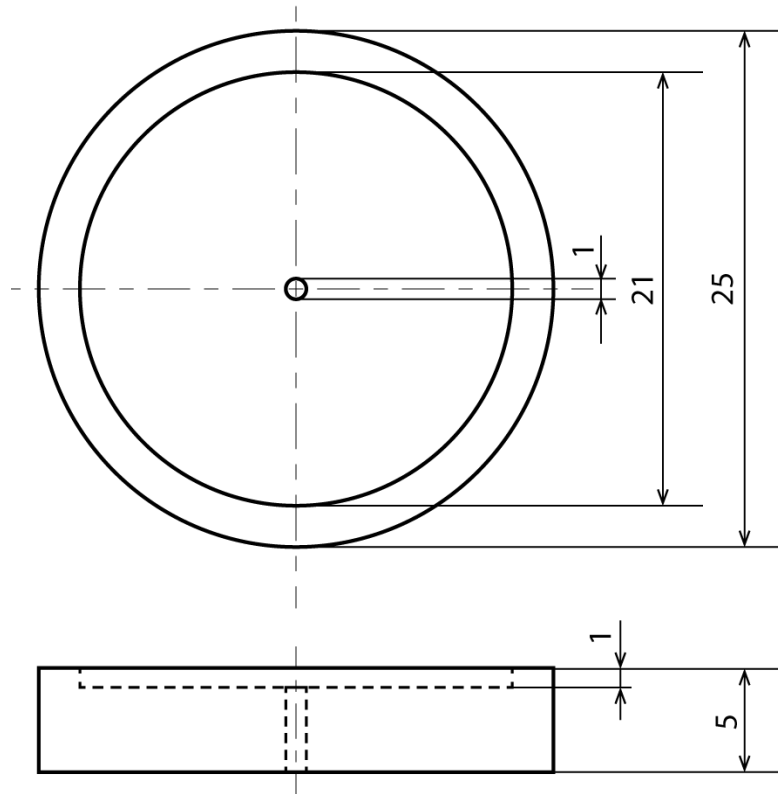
Top view (top) and side view (bottom) of pole aligner with dimension in mm
